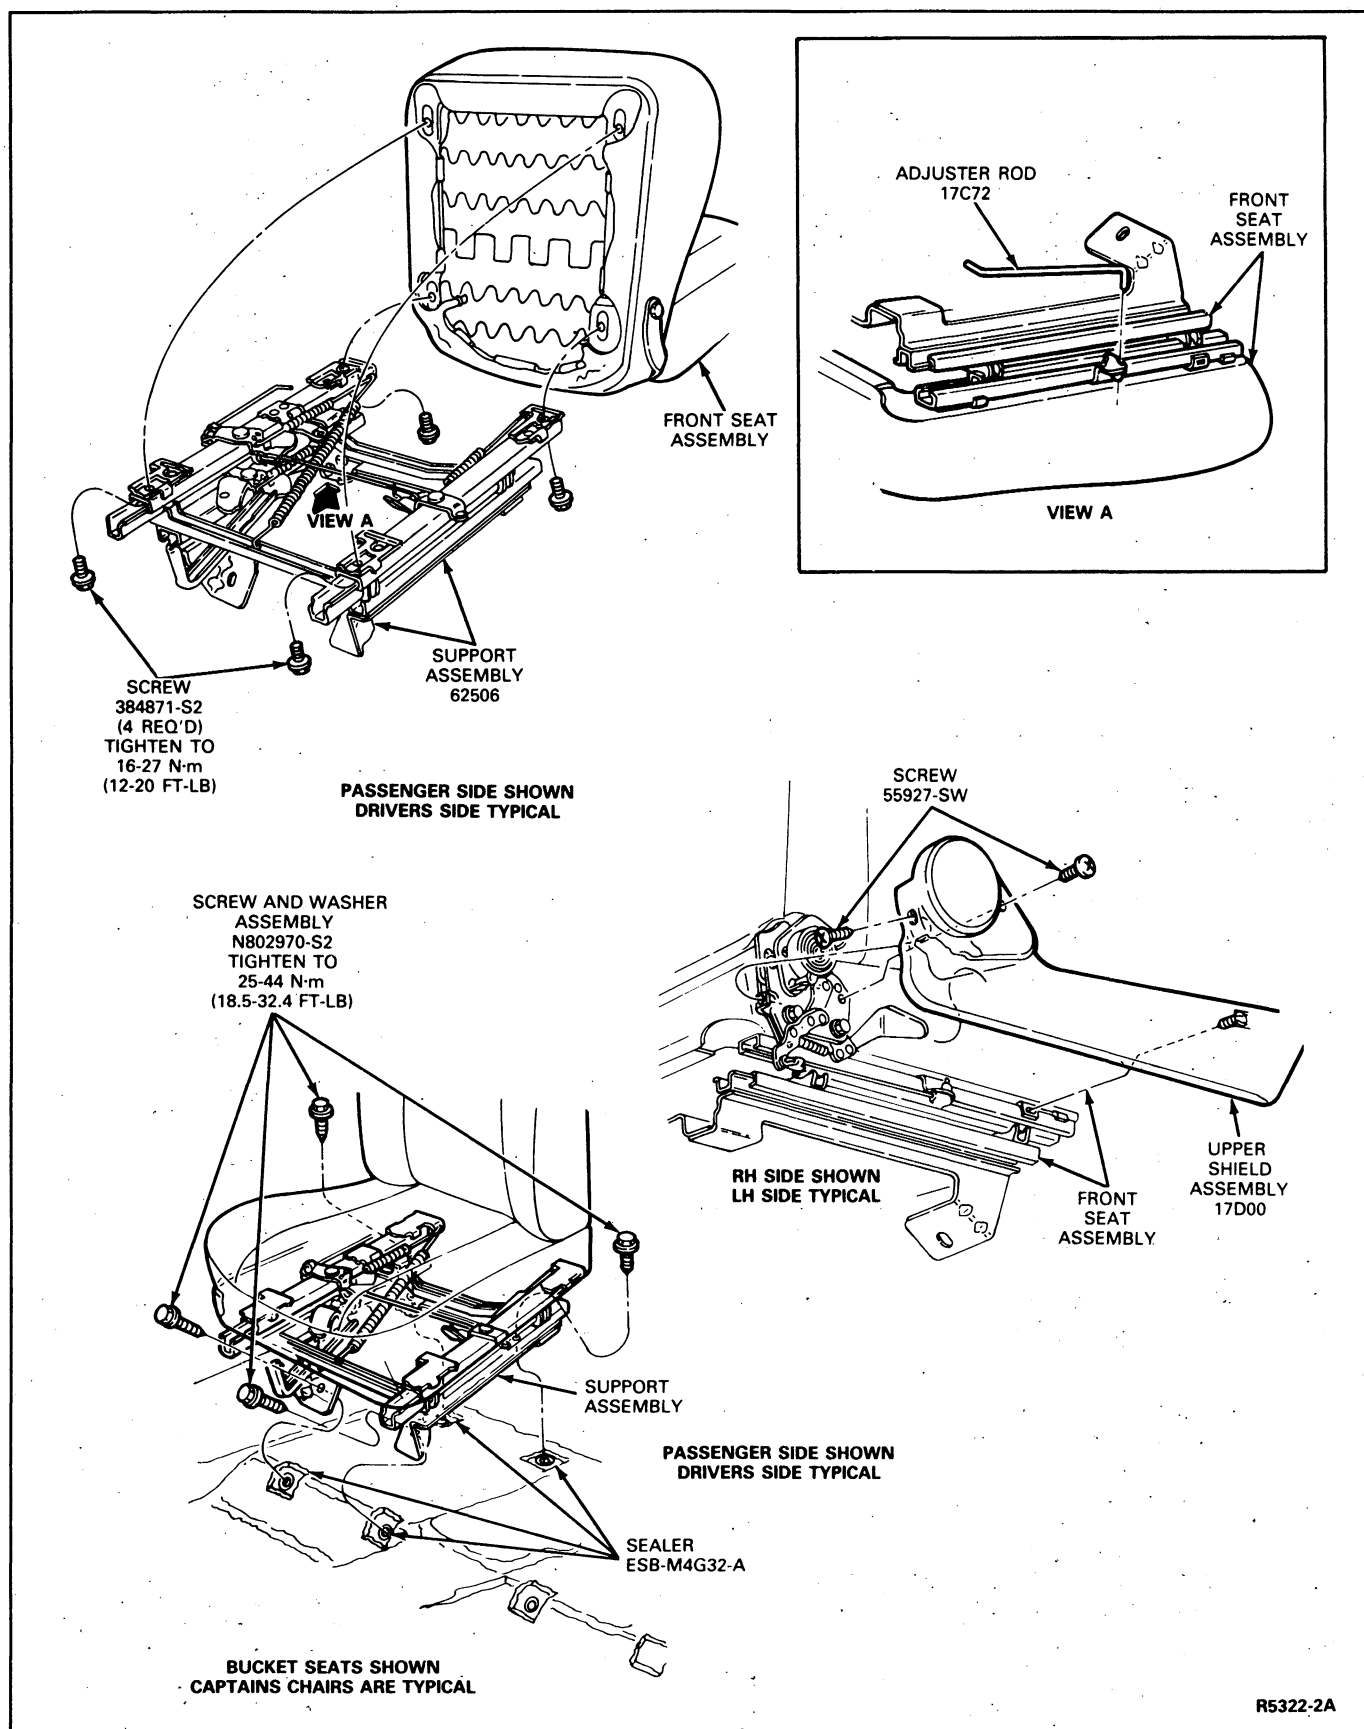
F-150—F-350 Super Cab and Bronco Bucket Seat Installation
